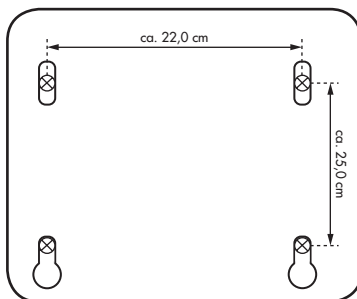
Drill holes HGK 1000/2/1 TDF Premium
